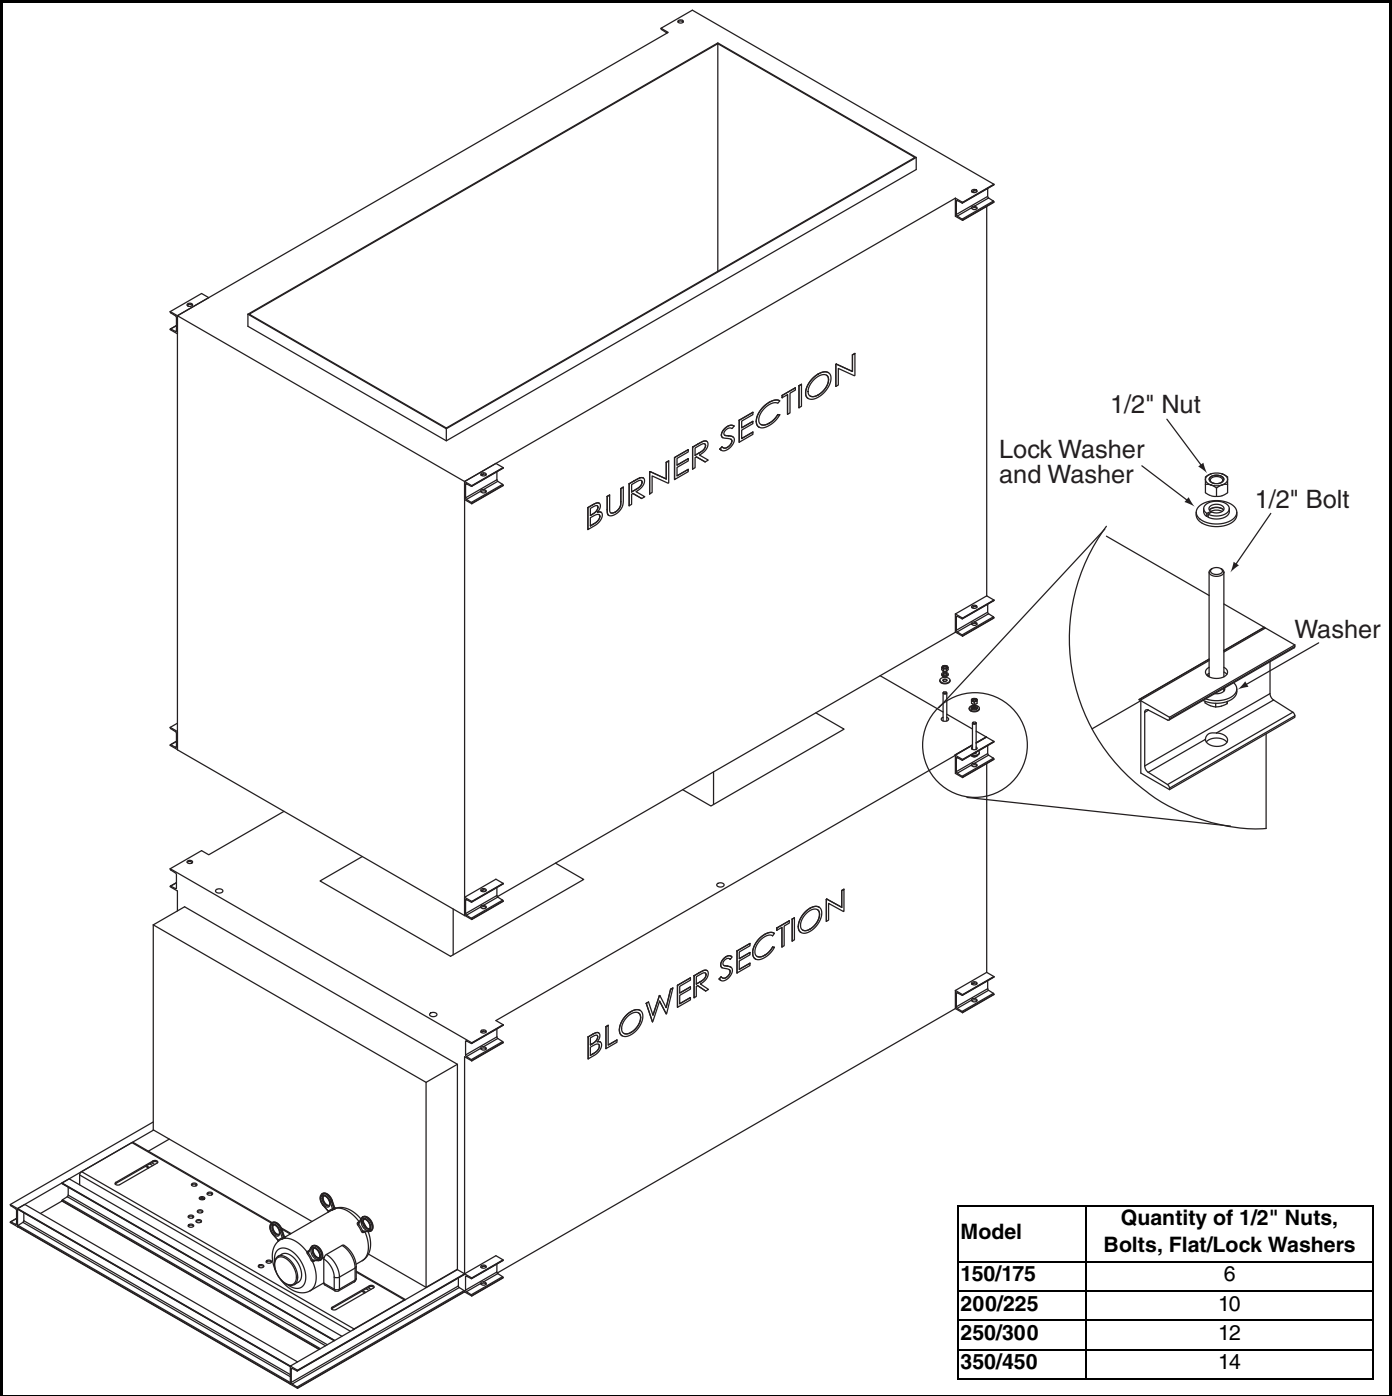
Air Handler Assembly - Upright (Models 150 - 450)
